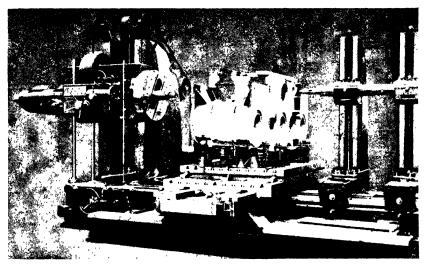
Horizontal boring a mono-block cylinder casting on a Kearns no. 5 widebed patent machine
